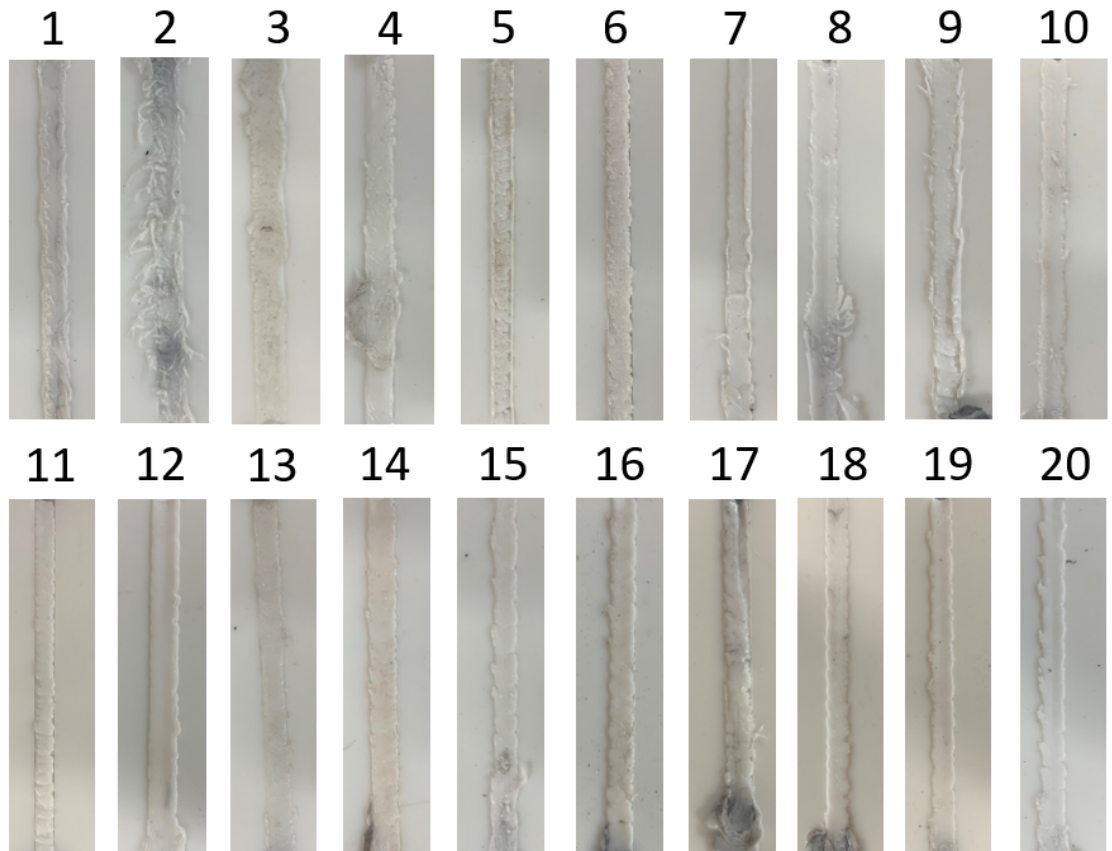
Weld sections for each completed weld run. Each weld label refers to “Run” parameters outlined in table 3.3.
